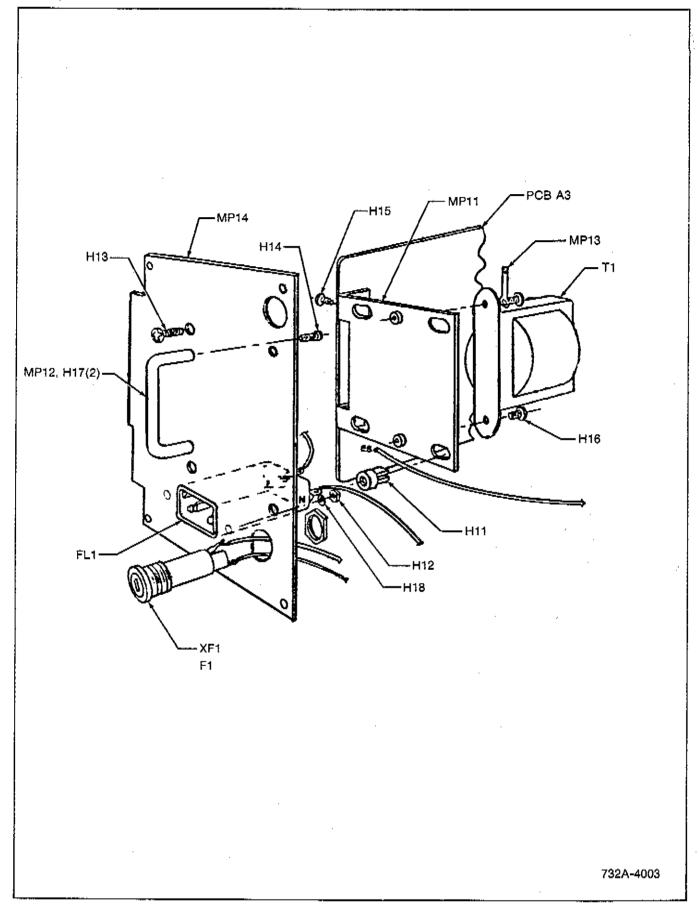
A3 Pre-Regulator PCB Assembly (cont)
